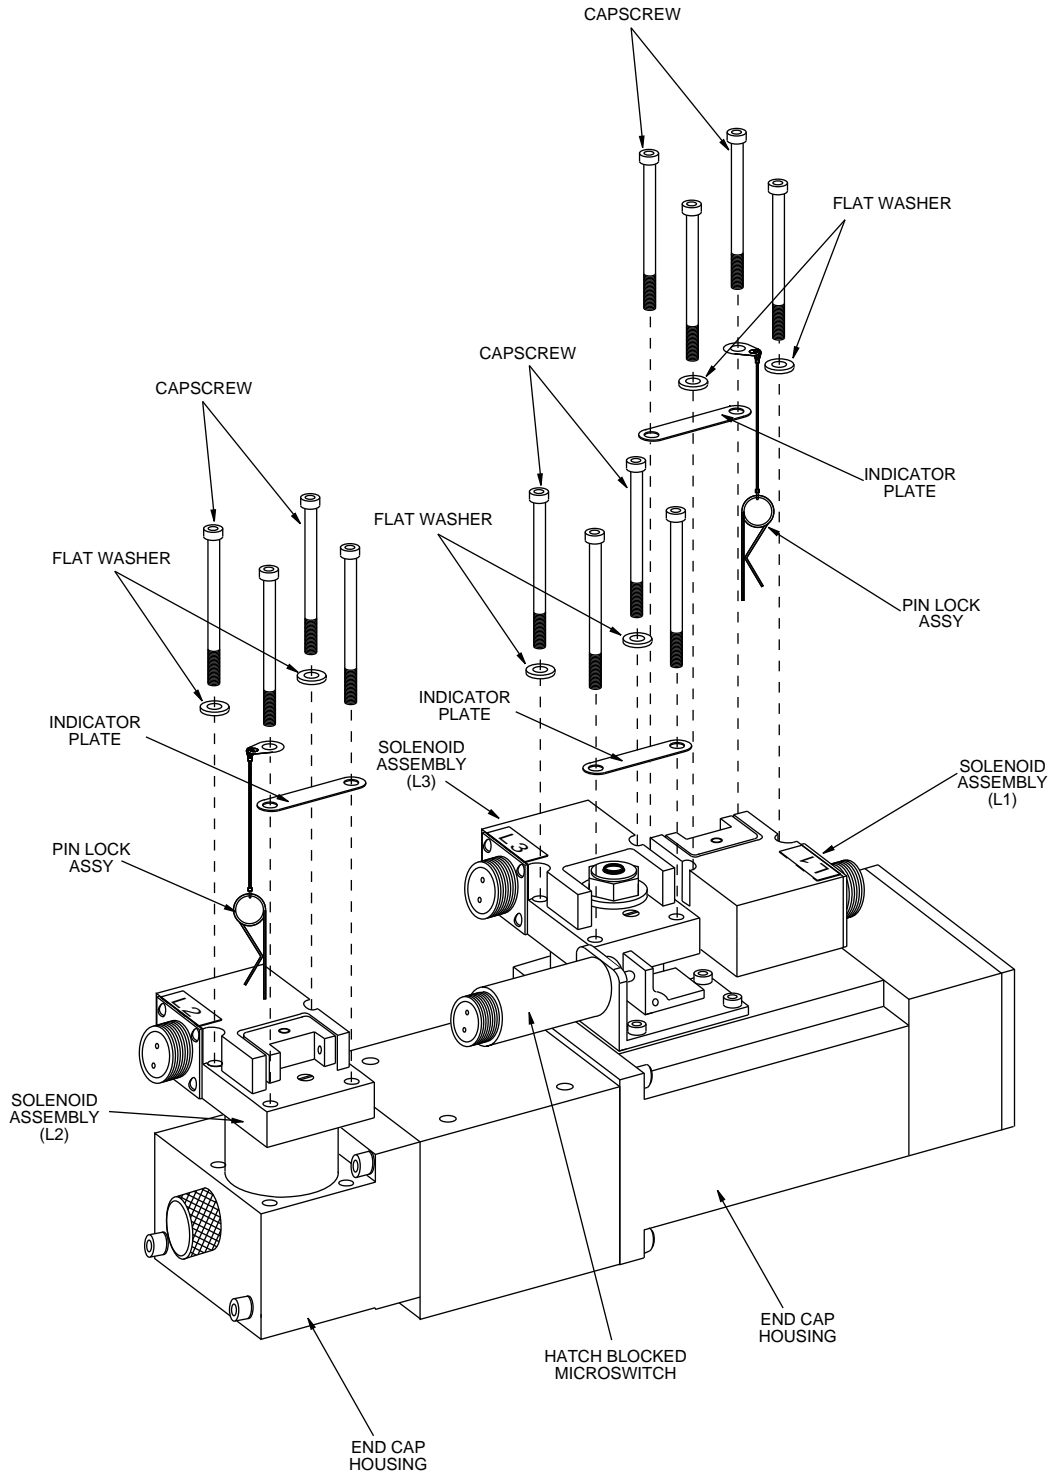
Solenoid Assembly Mounting Arrangement
